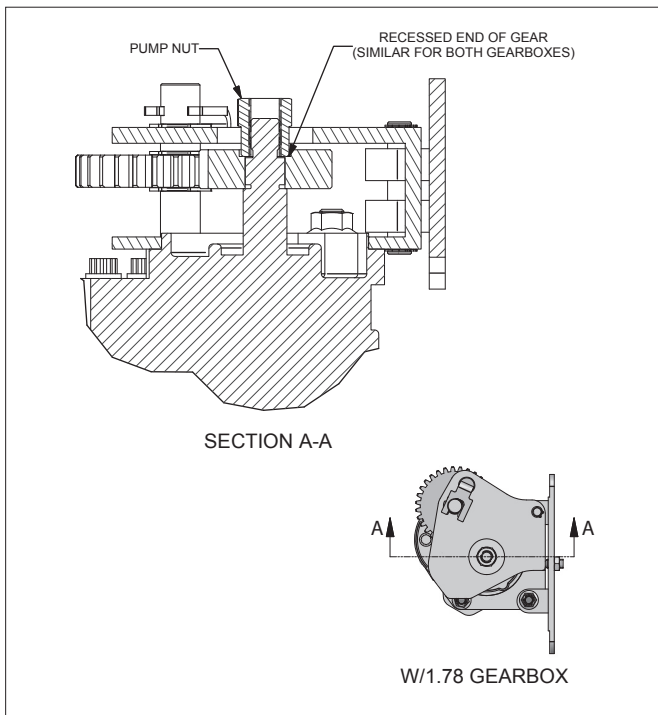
Hydraulic Pump Assembly - Ratio #7
